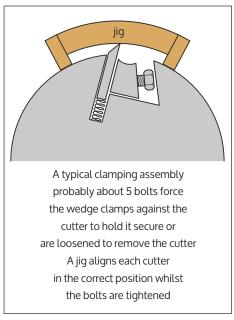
Diagram showing the side view of a typical cutterblock assembly
